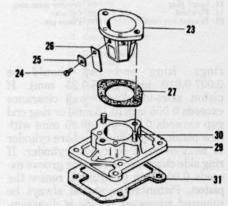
Exploded view of pyramid type reed inlet valve assembly and carburetor adapter used on Models MC-45 and MC-75. Six steel reeds (26) are used.
